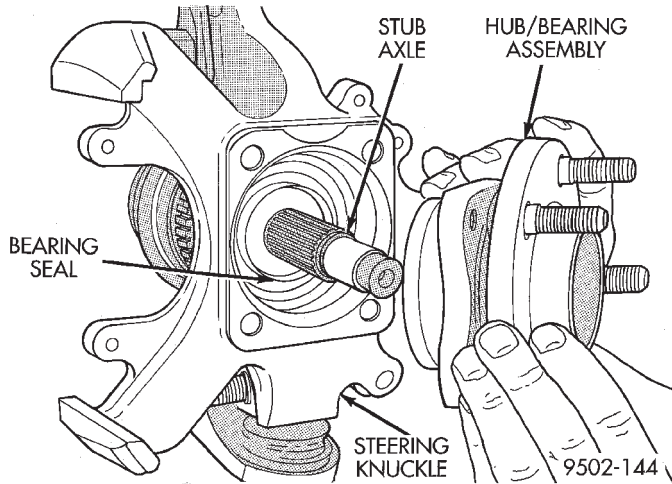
Hub and Bearing Assembly Removal From Steering Knuckle
